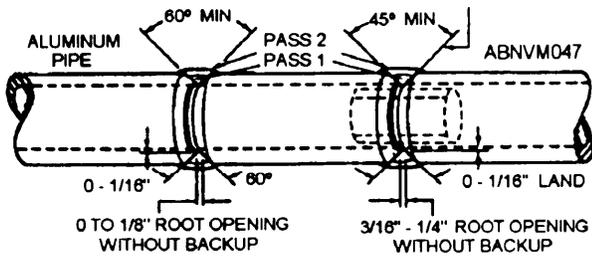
Joint design and weld pass sequence horizontal fixed-position multipass (GTA) welding.
